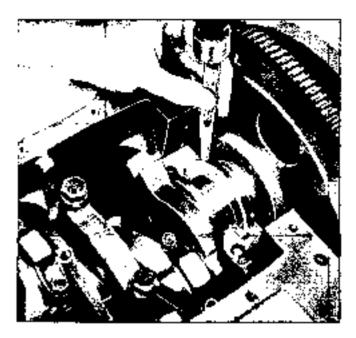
Removing Hoper Rear Main Oil Seal
